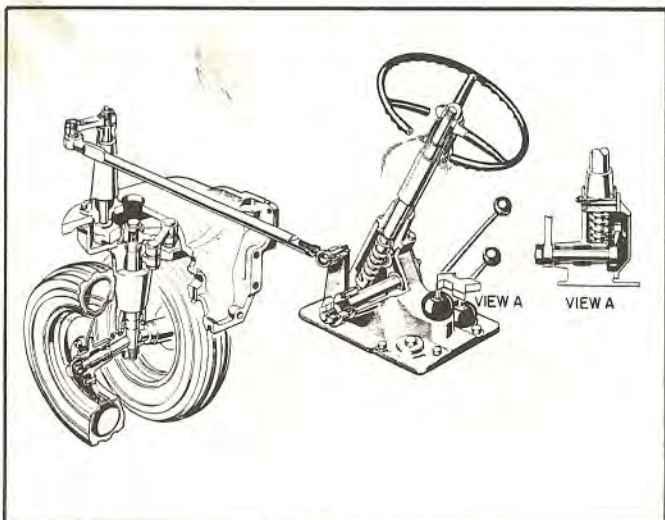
Twin Wheel Front End and Steering Mechanism
